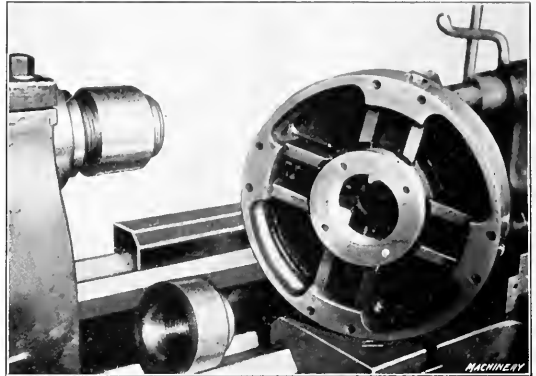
Adapter Bushing partially screwed onto Spindle of Reed Lathe
